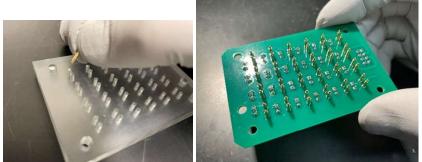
Placing the Mill-Max gold spring pins into a G10 electrode holder.
